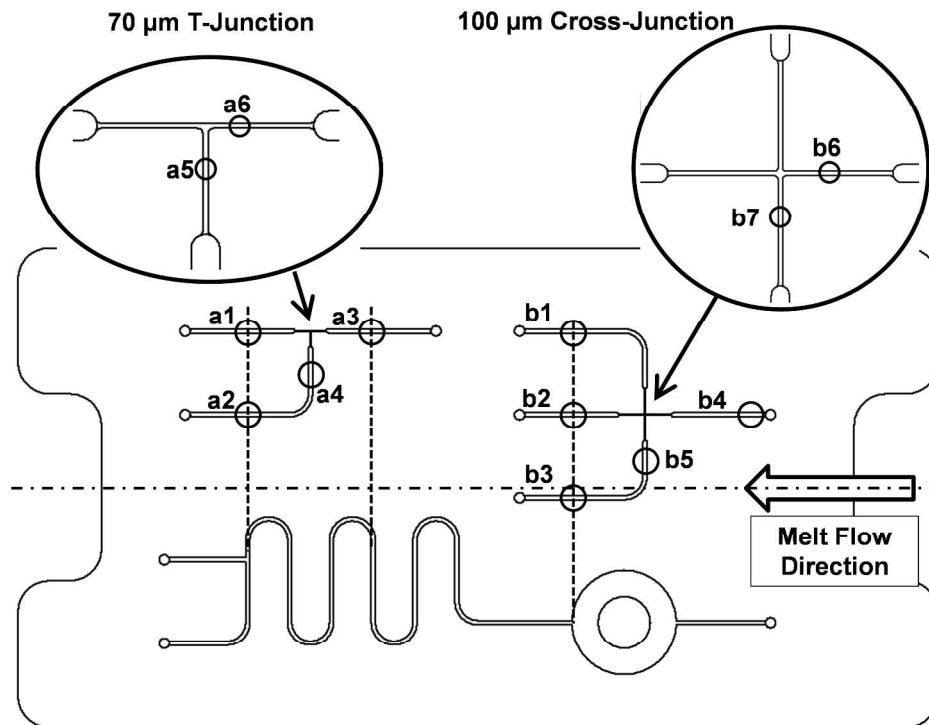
Insert for micro-fluidic feature molding, with examination positions of the injection molded chip. Overall dimensions of the insert: 88 x 46 mm.
